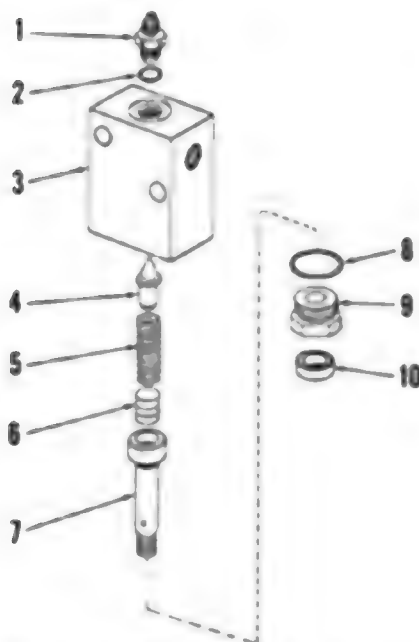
Exploded view of the Foot-N-Inch valve assembly.
